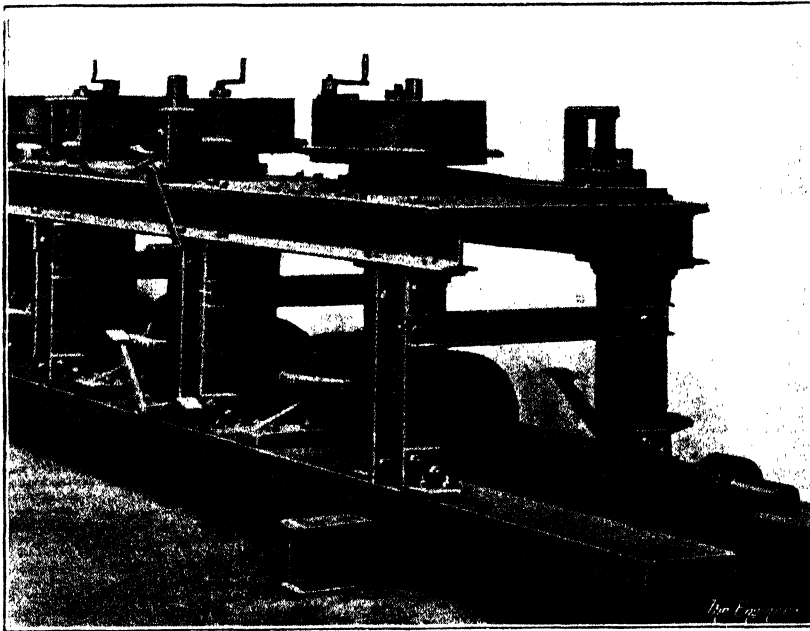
STEEL-FRAMED MACHINE—BARRON AND CROWTHER.
